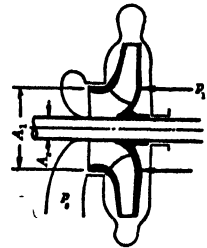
Axial thrust on a single-suction impeller. (Stepanoff, *op. cit.*)
